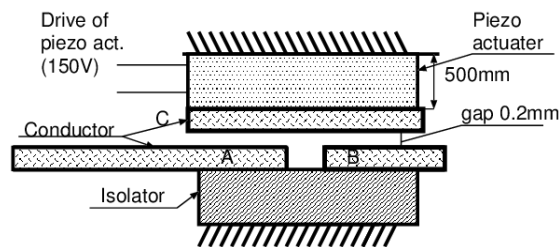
Conceptual design of mechanical contact driven by piezo electric driver. (Reproduced from [2.5.4.2].)
